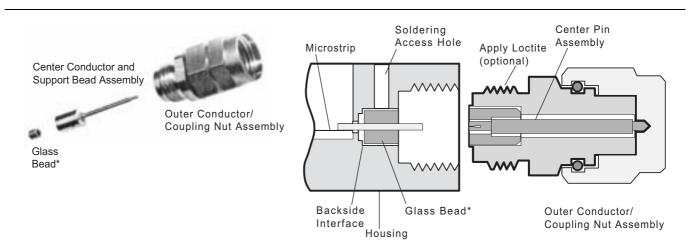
V102M-R Assembly (*Glass Bead not supplied)
